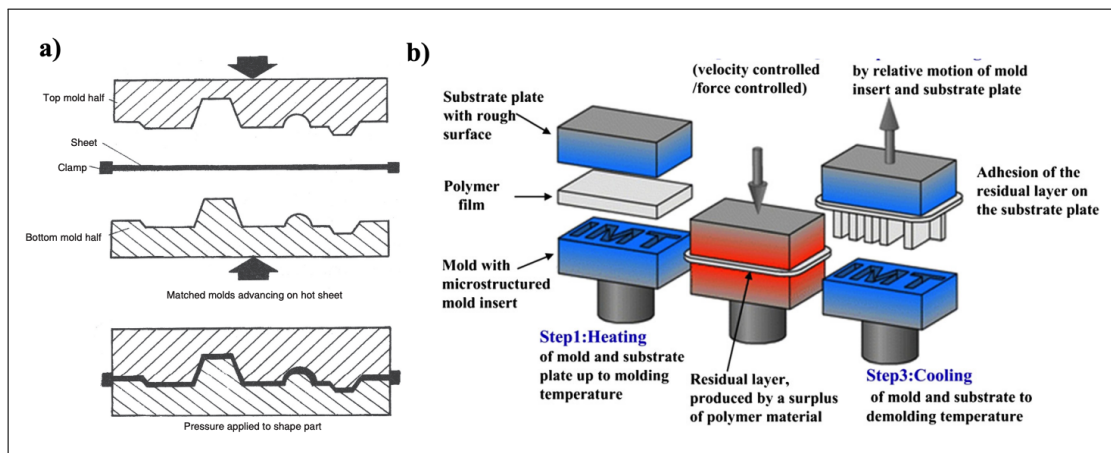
a) Schematic of matched mould thermoforming [58]. b) Schematic of a typical micro hot embossing [59].
